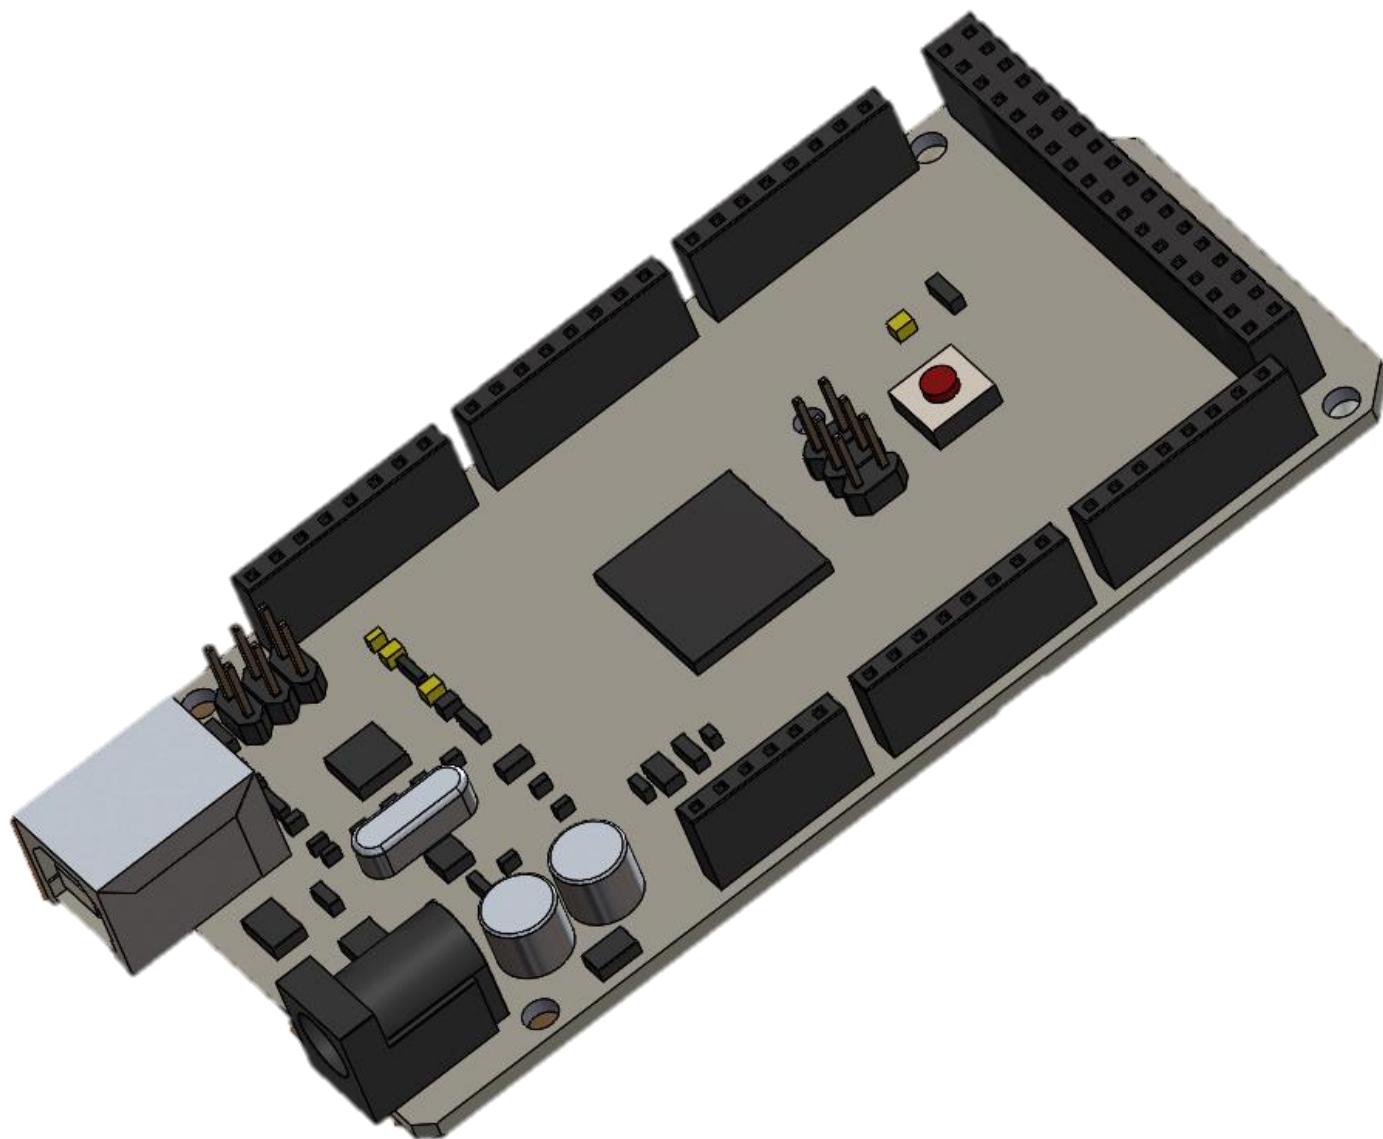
Part 1003 (Arduino Mega 2560 Rev3) CAD Drawing
